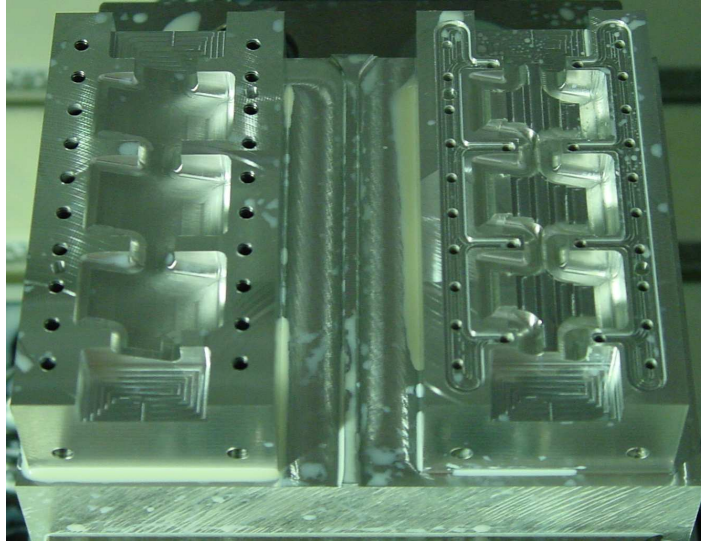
Wedge-shaped filter halves during the manufacturing process.
